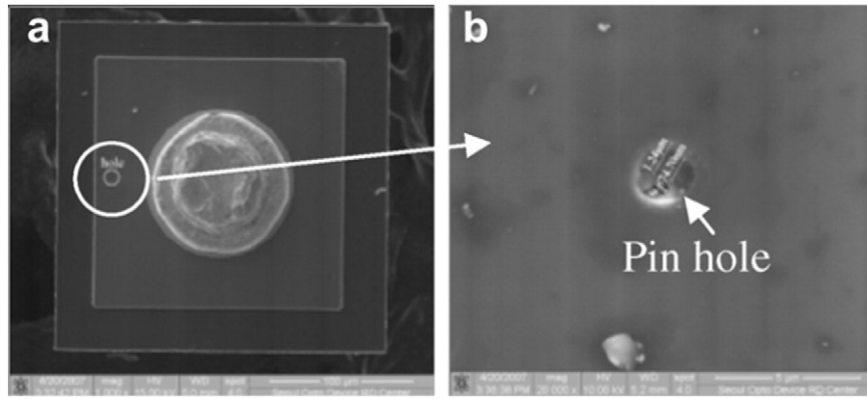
LED Leakage failure occurred by defect of pin hole [2].
